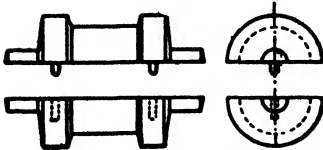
Two-piece Pattern for Hollow Cylinder.
